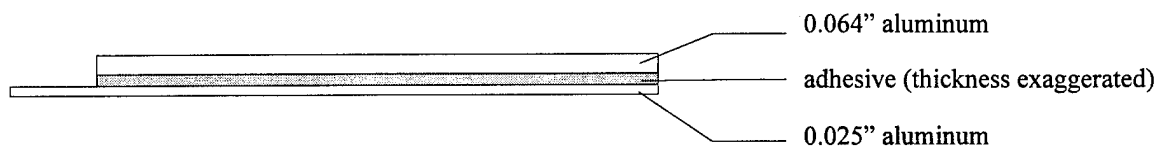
Cross Section of a Floating Roller Peel Test Specimen
